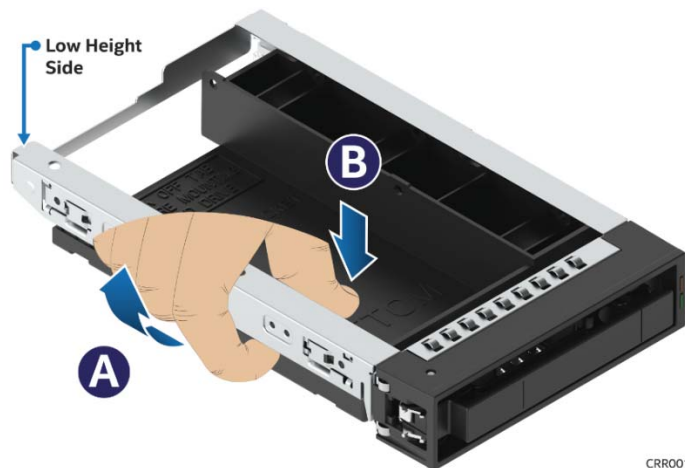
3.5" Drive Carrier Assembly – Drive Installation to Carrier
